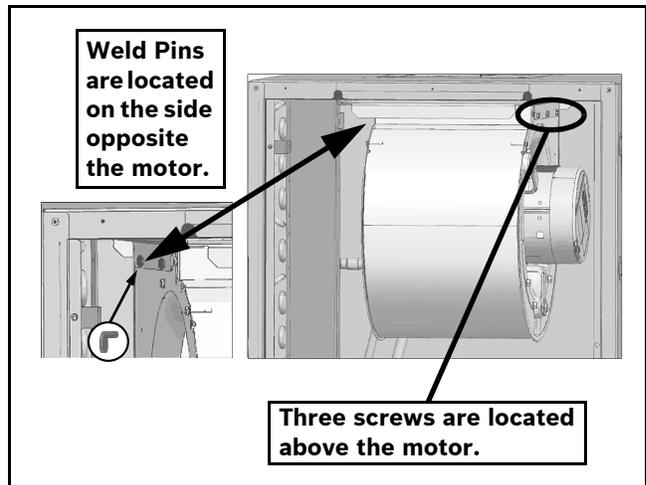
Screws and Welded Pins Locations for Vertical Units
